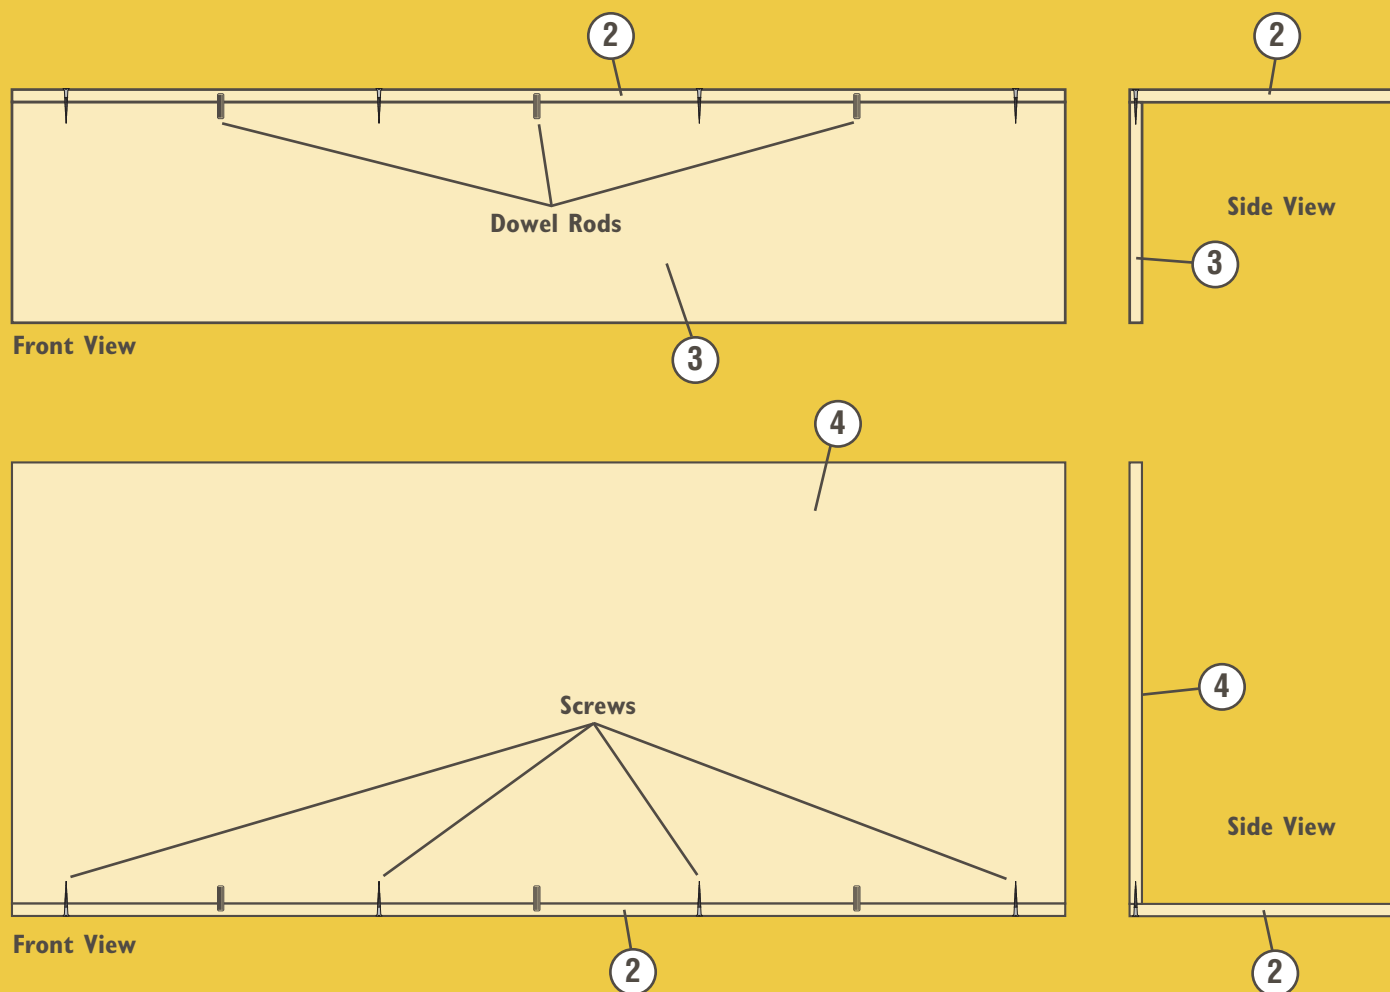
Top and Upper Headboard/Bottom and Lower Headboard Assemblies
